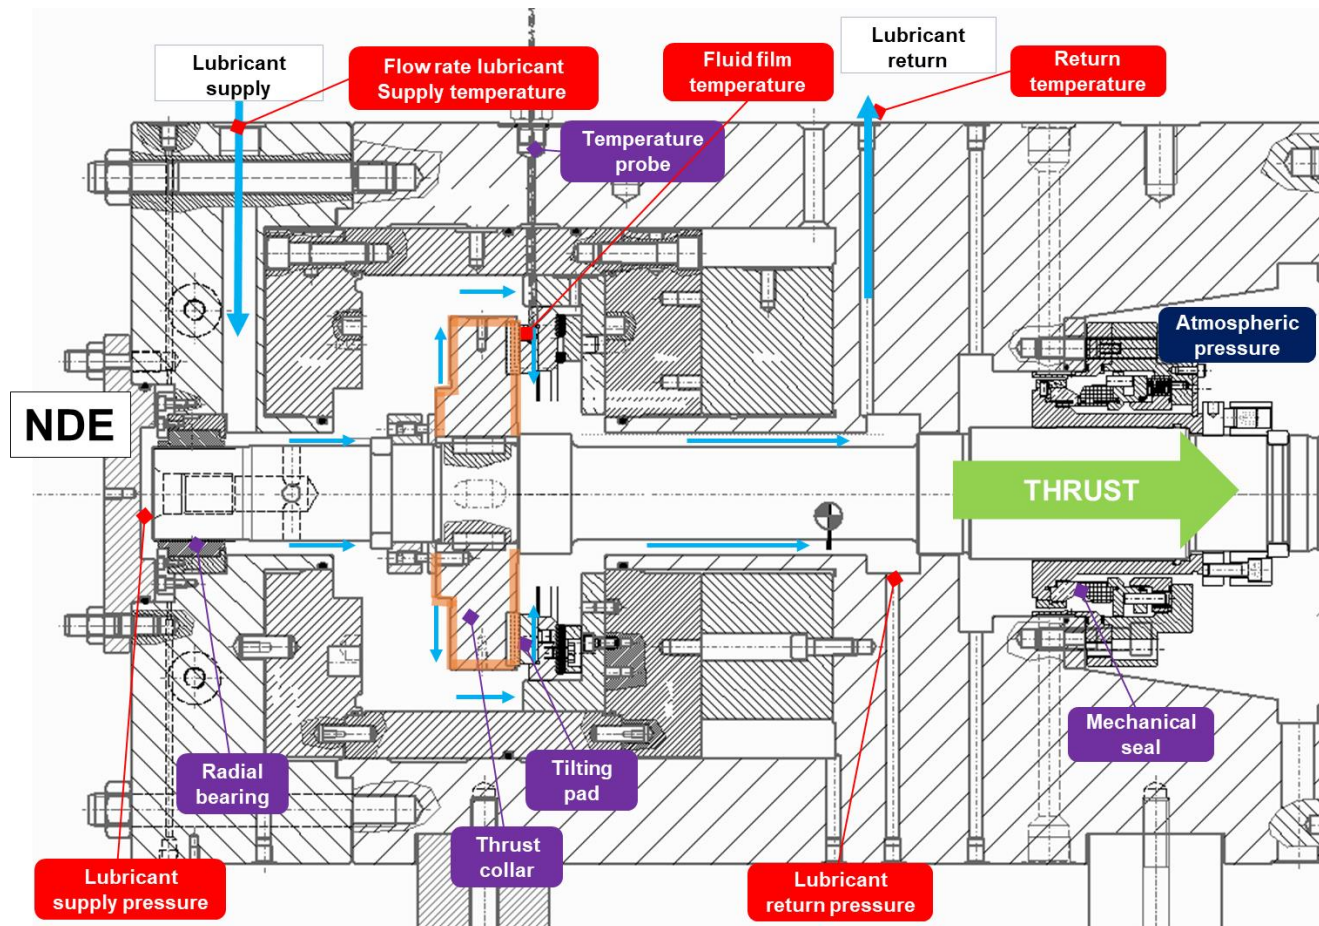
Cross sectional view of thrust bearing test rig, indicating the position of the various sensors.
